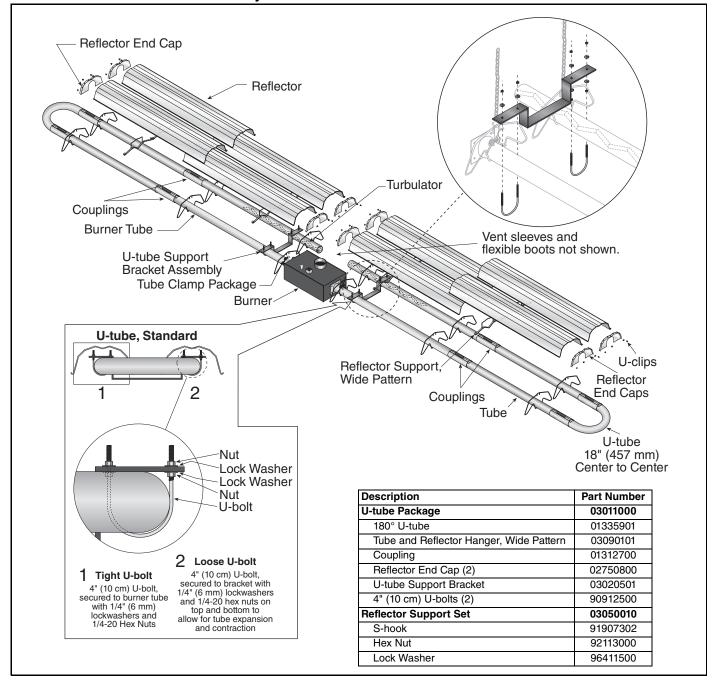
U-tube Heater Tube Clamp Installation for Short Suspension
